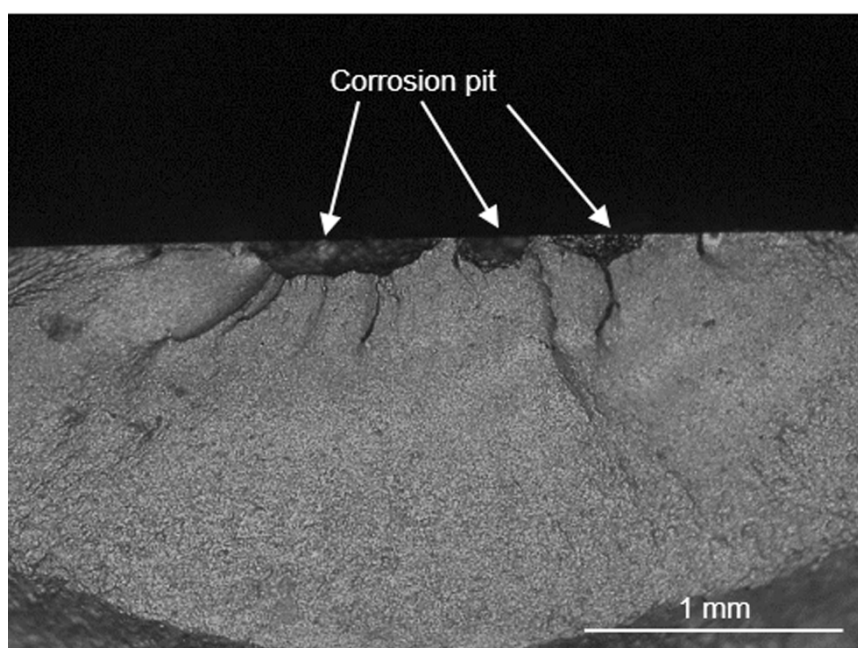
Fracture surface of FSW joint with 96-h corrosive exposure
